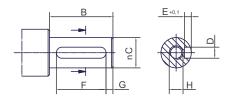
Dimensional drawing for BSH-205 2, 205 3 with optional terminal box
